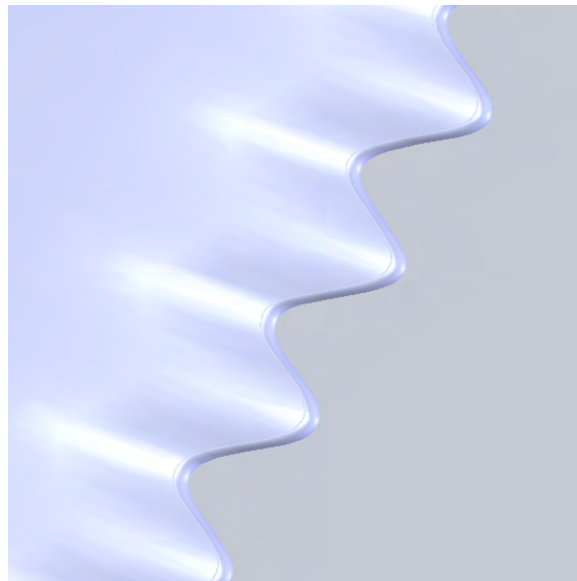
CAD Isometric view of compressor blade with tubercle modified leading edge
